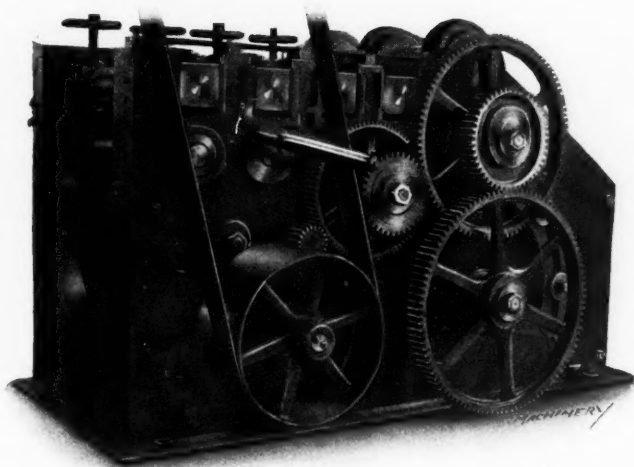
Opposite Side of Sleeper & Hartley No. 5 Spring Coiler shown in Fig. 1
